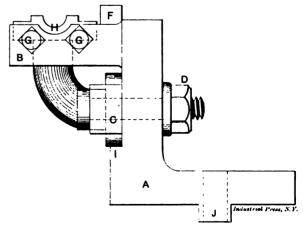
Plan and End View of Fixture for Holding Bracket shown in Fig. 7. respectively, the bearing Y being milled to an exact half-circle of the radius required, so as to conform with its duplicate in the cap. This is afterward fastened to the bracket and the bearing reamed to the finish size. The fixture consists of one main casting in the form of an angle
